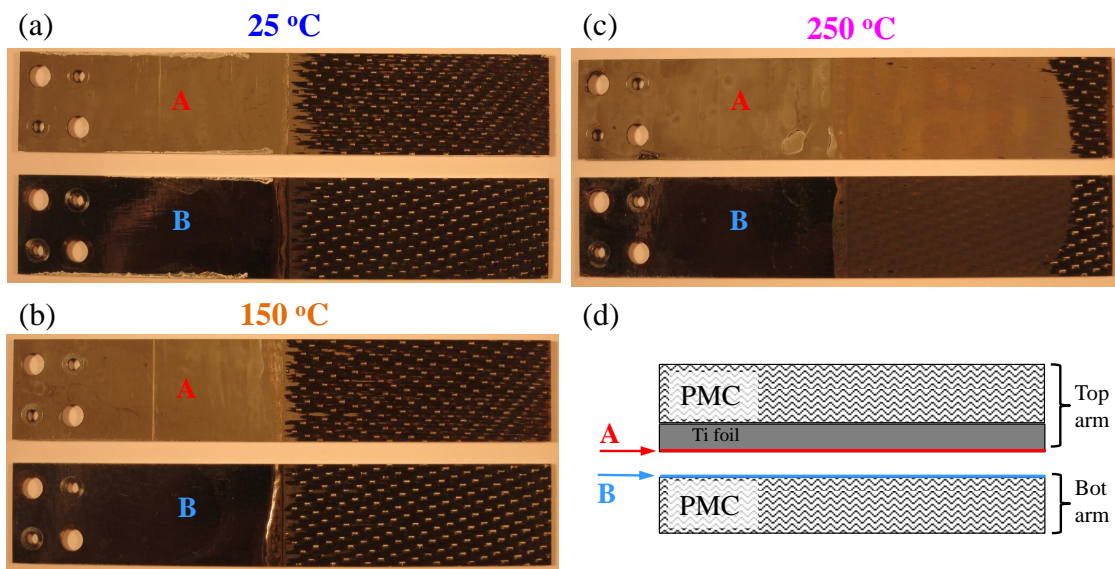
Fracture surfaces from tested DCB specimen from panel Ti-PEI-1-hour (a) 25 °C. (b) 150 °C. (c) 250 °C. (d) Schematic of a tested DCB specimen illustrating the locations of surface A and surface B showing in Figures 6.16 (a-c) and 6.17 (a-d).
